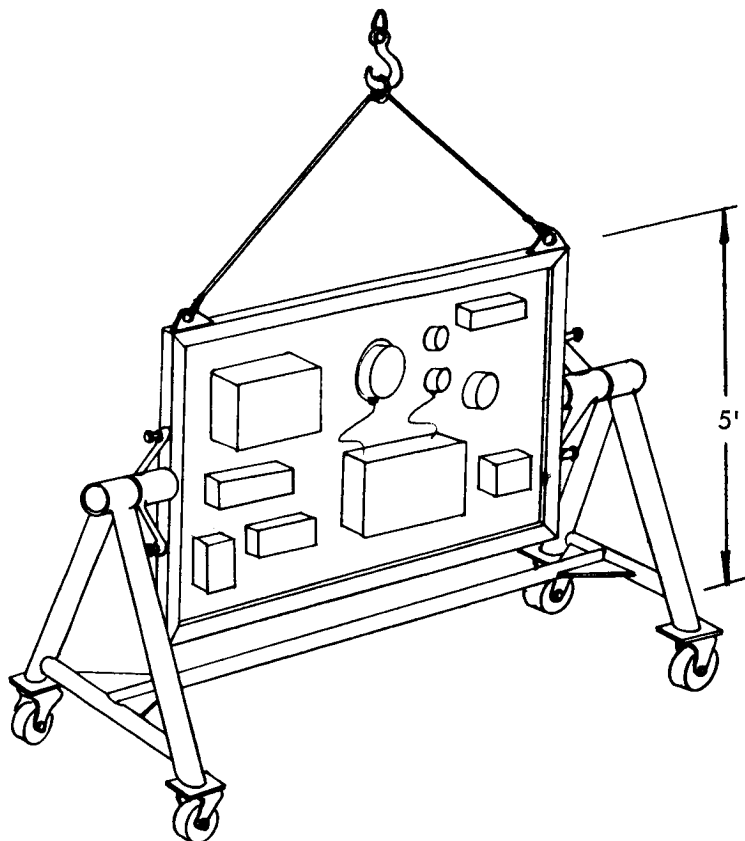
Equipment Mounting Panel Handling Fixture, MOSE 28
